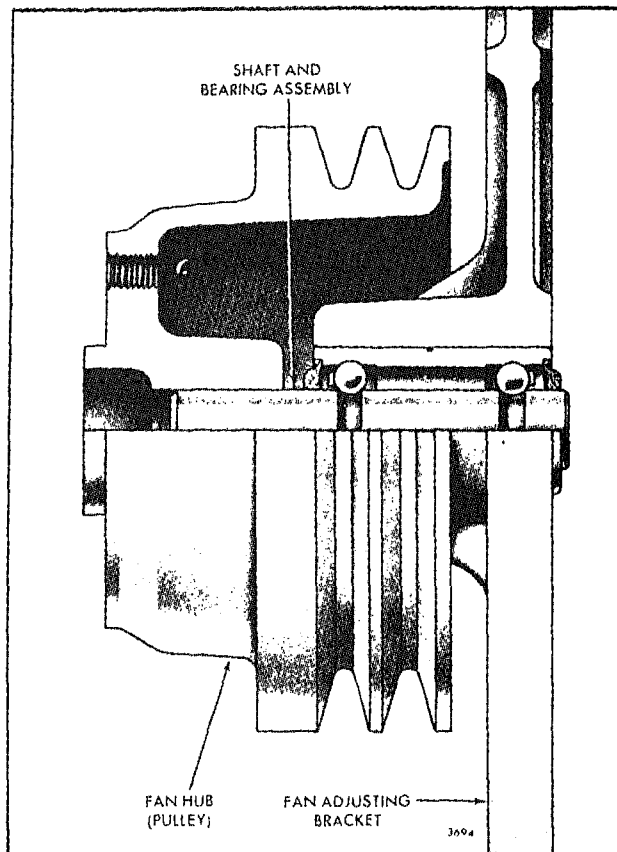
Former Fan Hub Assembly (In-Line Engine)
